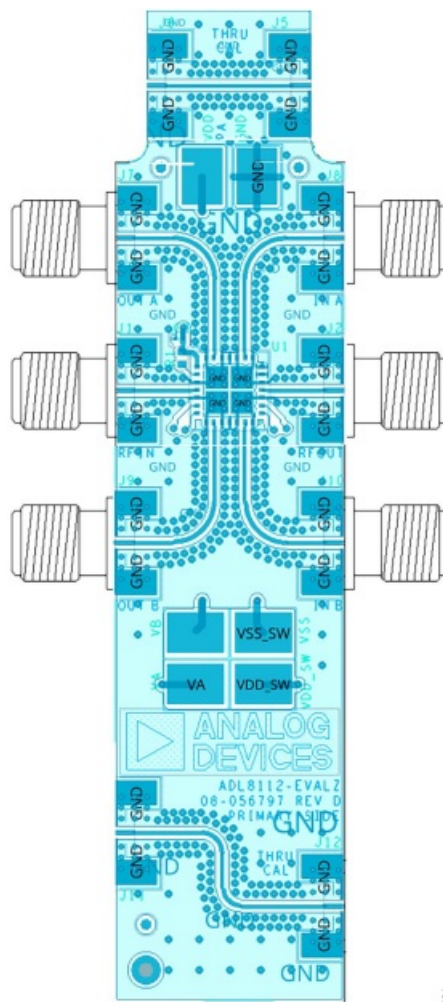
ADL8112-EVALZ Assembly Drawing (J5, J6, J11, and J12 Are Not Installed)
